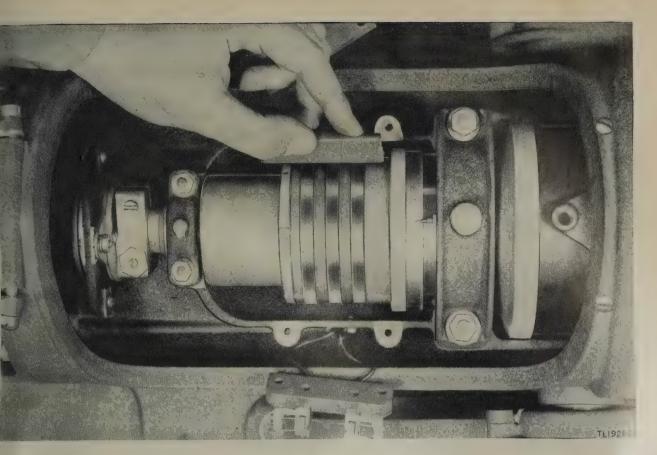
Bearing Indicator BC-1159-A, polishing slip rings.
